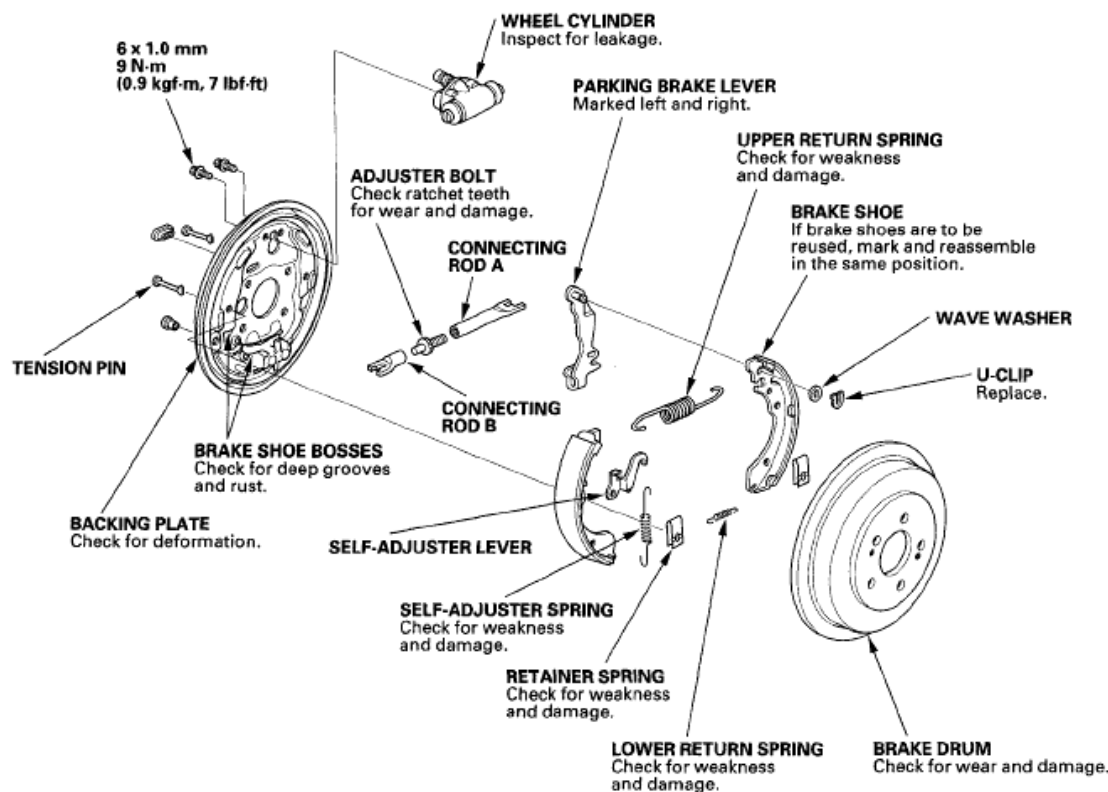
Identifying Rear Drum Brake Components (With Torque Specifications)
